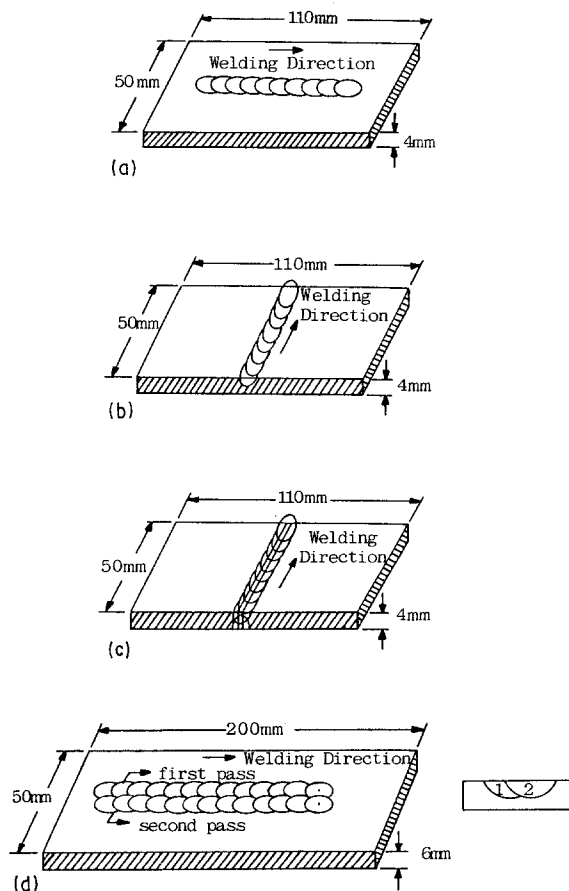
Dimensions and weld bead configuration of specimens for the U-bend and/or tensile tests. (a) Autogenously welded (condition 1), longitudinal specimen. (b) Autogenously welded (condition 1), transverse specimen. (c) Butt-joint-welded (condition 1), transverse specimen. (d) Overlapped remelting (conditions 2, 3, 4 and 5), longitudinal specimen (U-bend test only).
